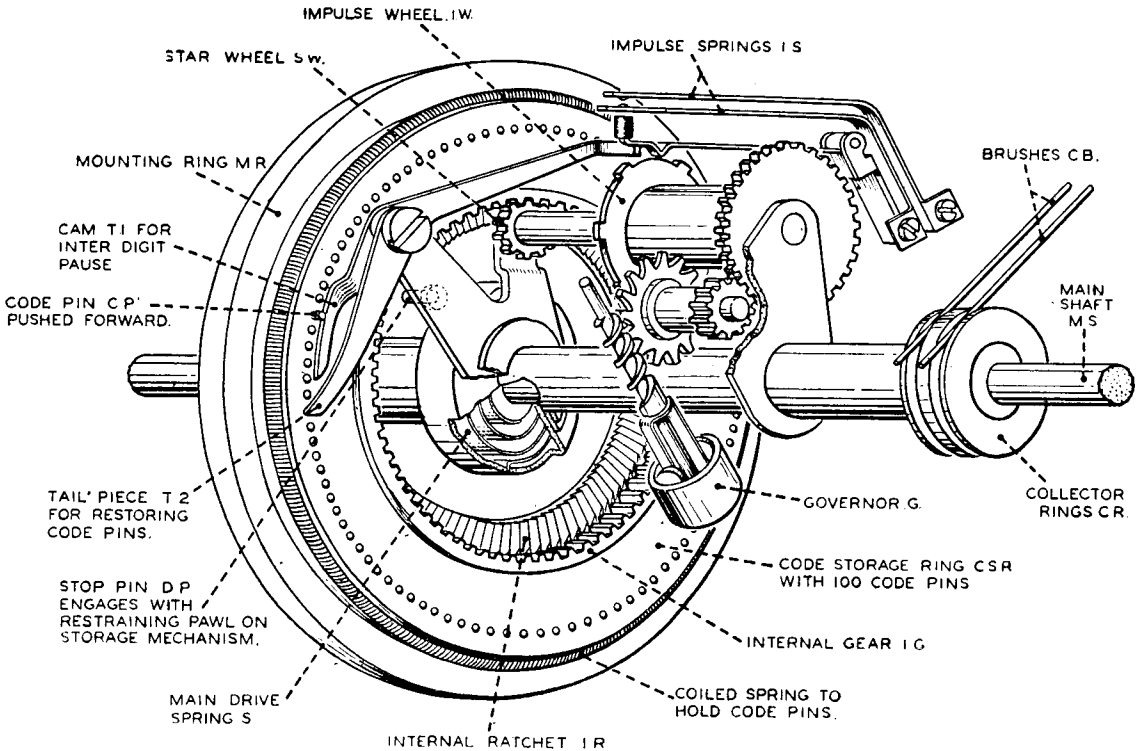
CODE STORAGE AND IMPULSE SENDING MECHANISM
